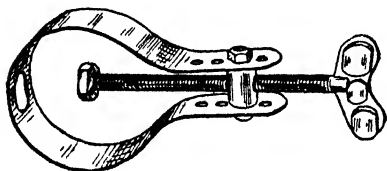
A useful Device for forcing Out Gudgeon Pins.
